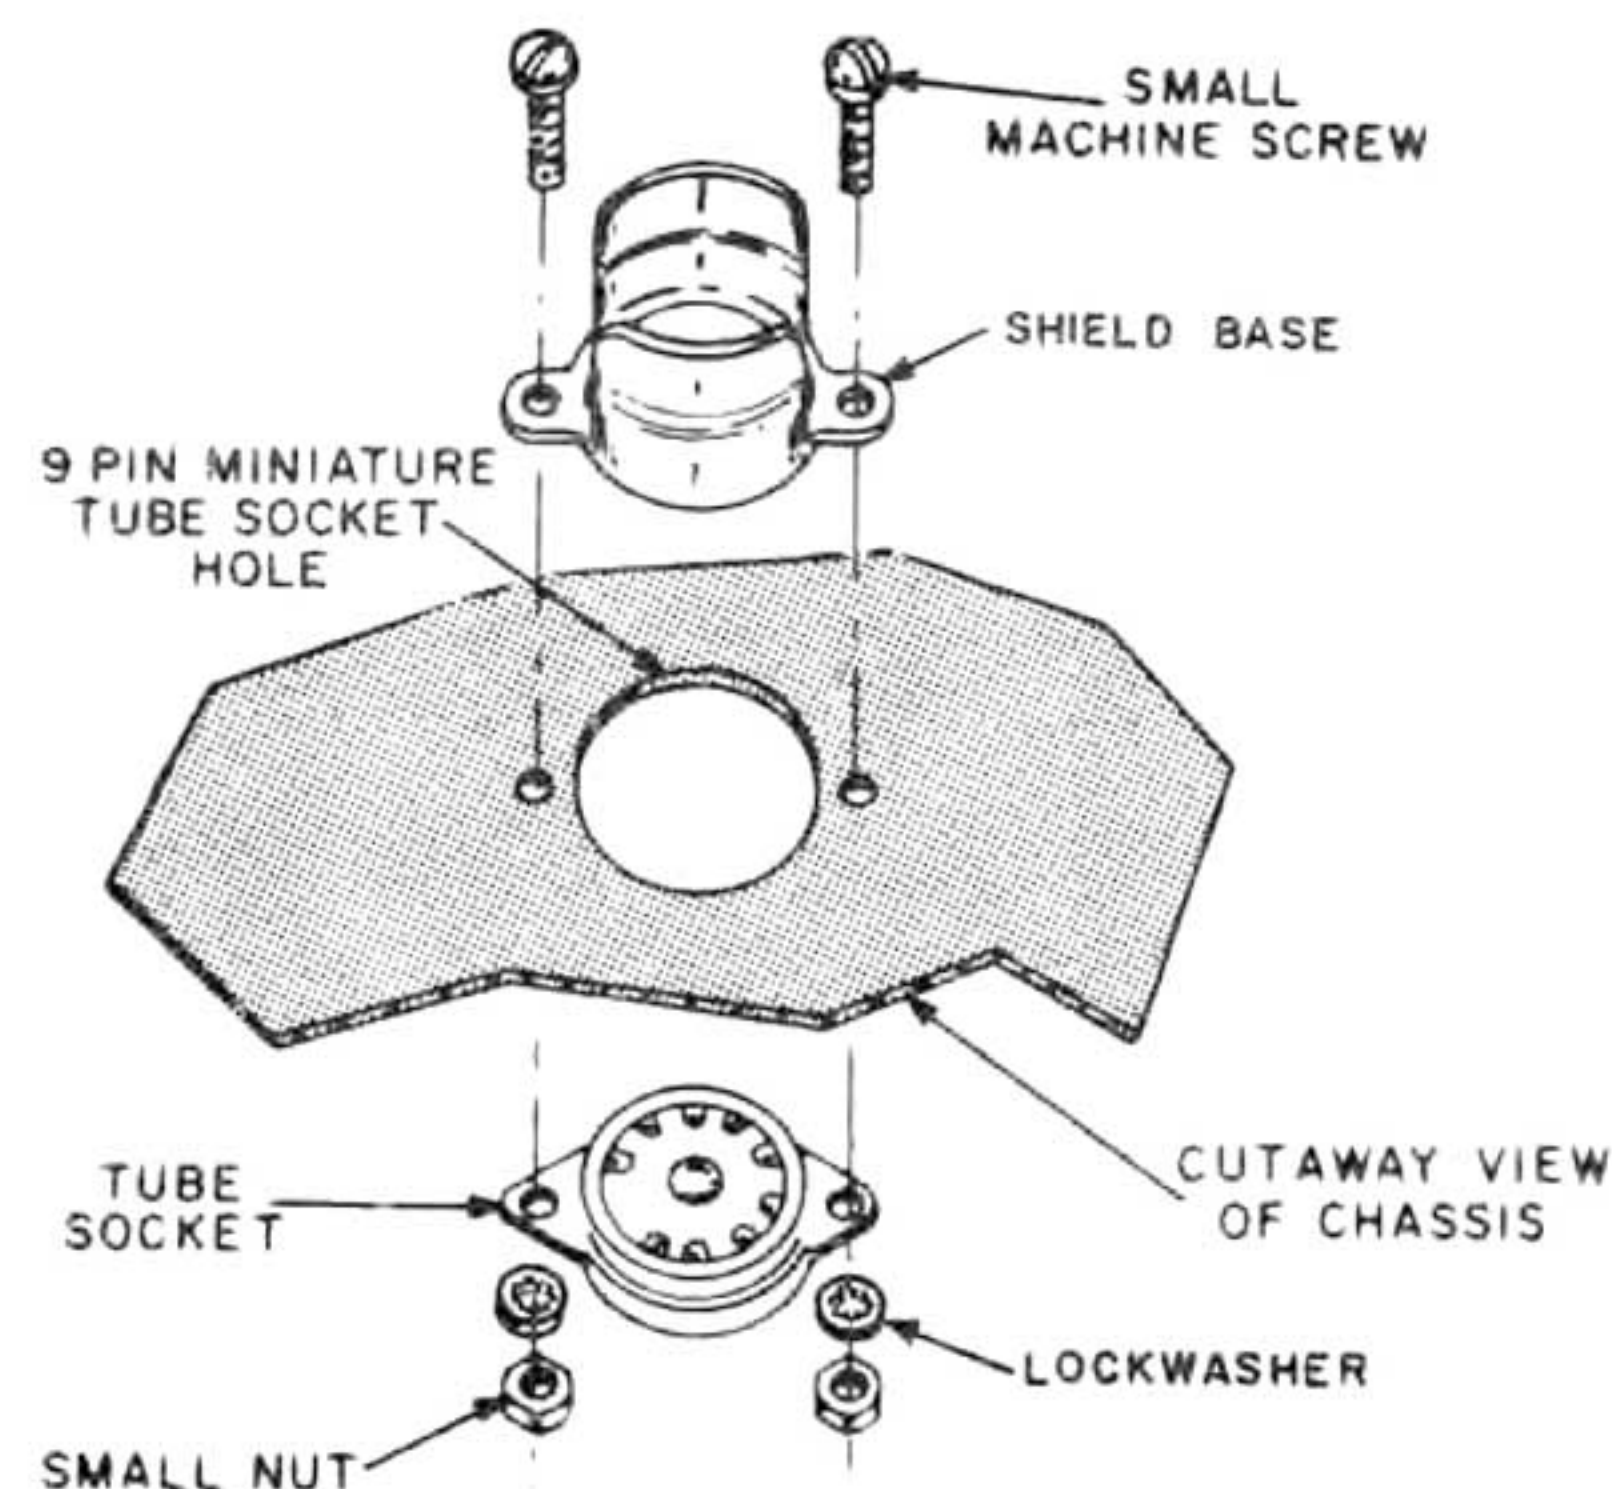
HOW TO MOUNT A TUBE SHIELD BASE
